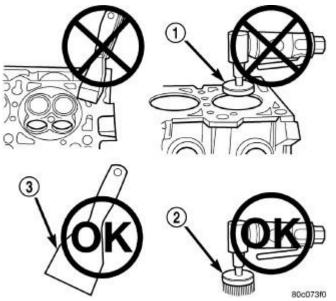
Proper Tool Usage For Surface Preparation Courtesy of CHRYSLER GROUP, LLC
